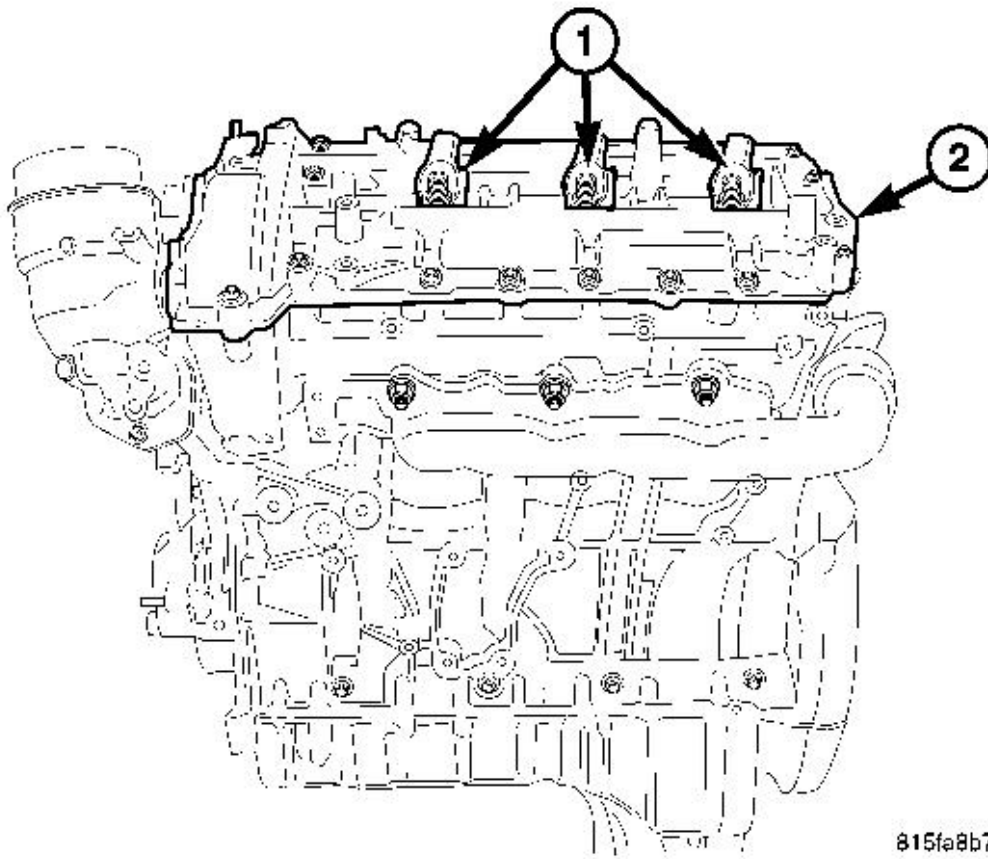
Fuel Injector Body & Left Fuel Injectors
